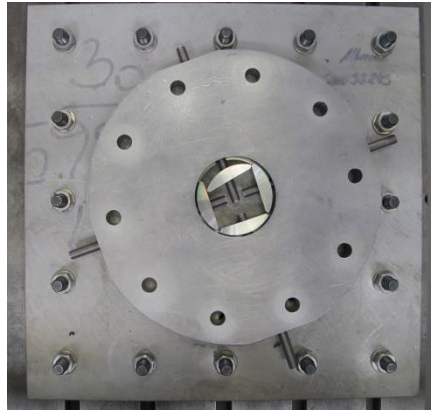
Simple pipe mock-up: Adapter plate and base plate
